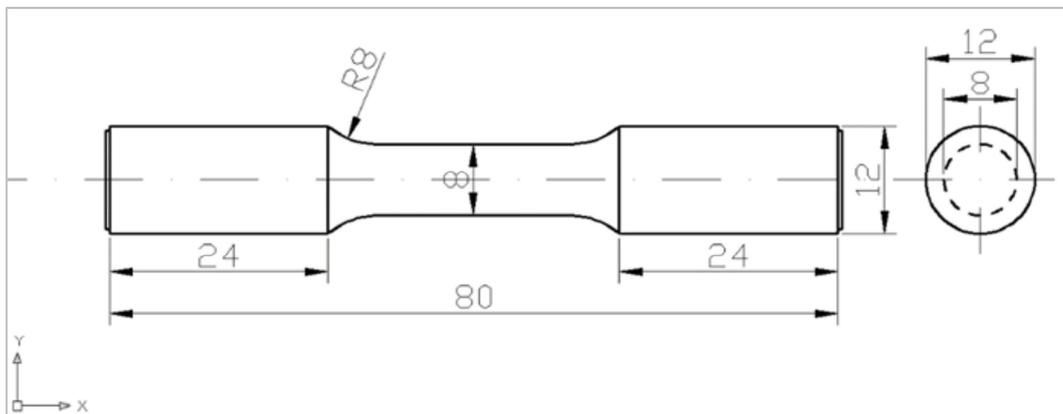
Fatigue test specimen according to JIS Z 2274 standard.
